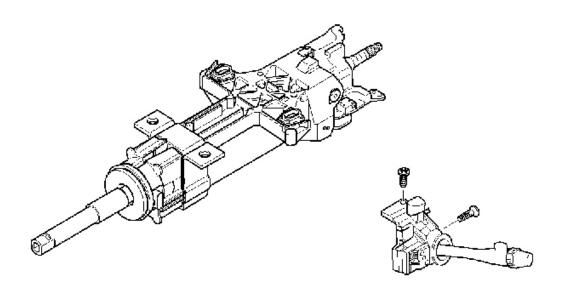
Removing/Installing Turn Signal Switch Assembly Courtesy of GENERAL MOTORS CORP.
